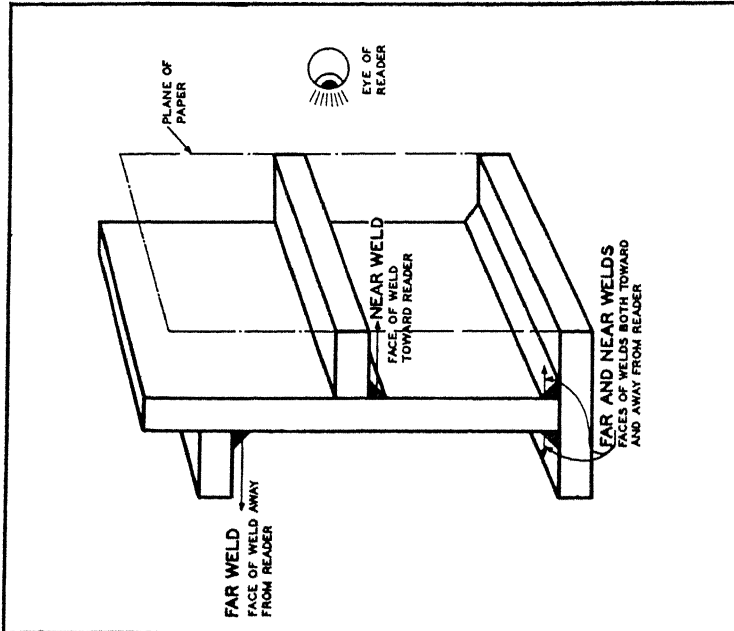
Facing of fillet welds parallel to plane of paper.
